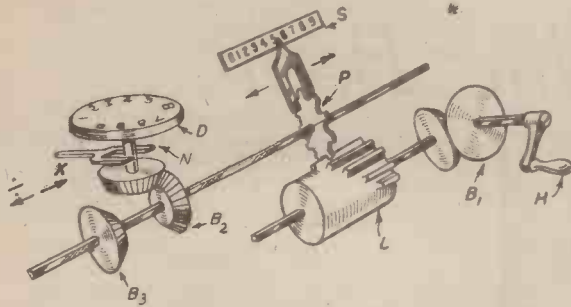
Mechanism of Glashütter Archimedes machine.
